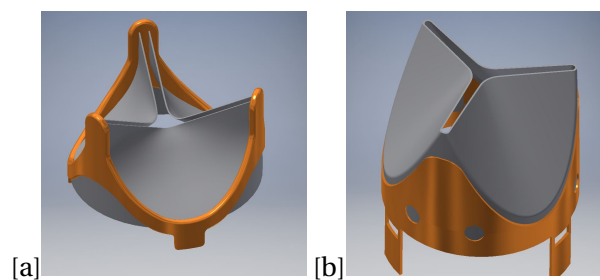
CAD designs of the heart valve leaflet attachment to the frame for the (a) PV short and (b) PV tall heart valves.
